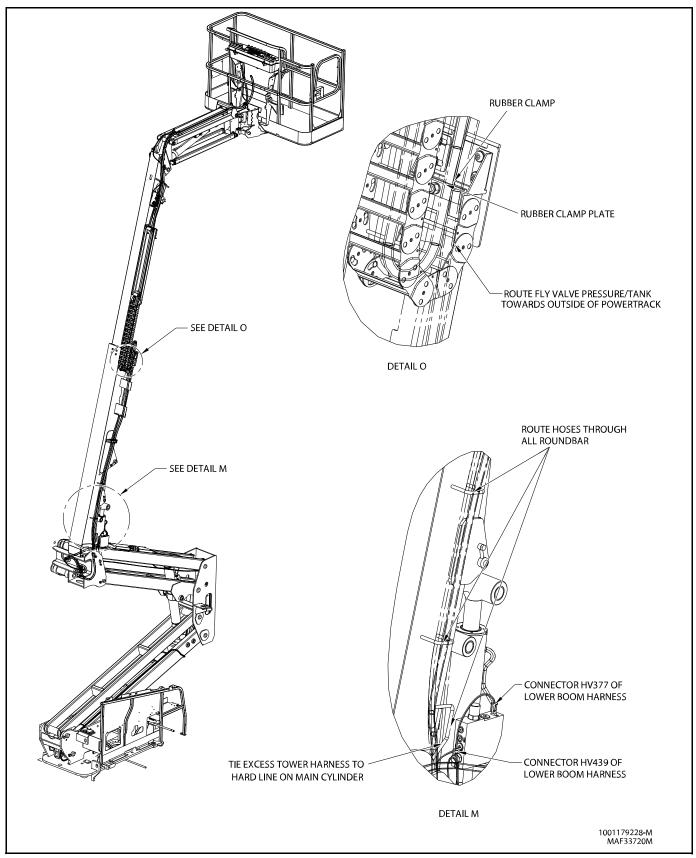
Cables and Clamps Installation - Sheet 5 of 8
